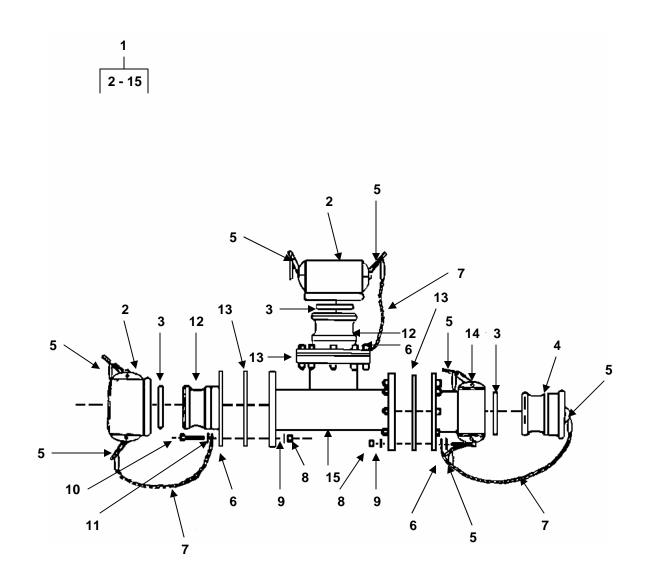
Tee Assembly, 6 Inch (Models PD5430-0001 and BA91-142)
